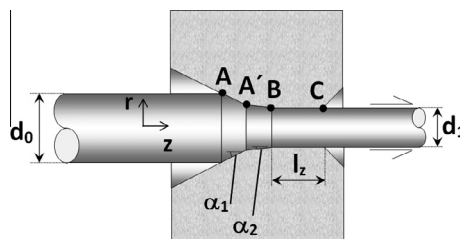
Innovative wire drawing (varying die angle): two consecutive diameter reductions during drawing.
